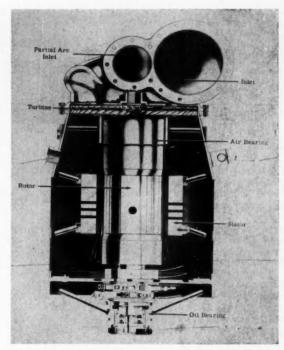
A single shaft and set of bearings simplify a turbine-driven constant-speed drive. This unit supplies its own cooling. Improved insulation on the generator windings may move the generator temperature limit up to 800 F.
